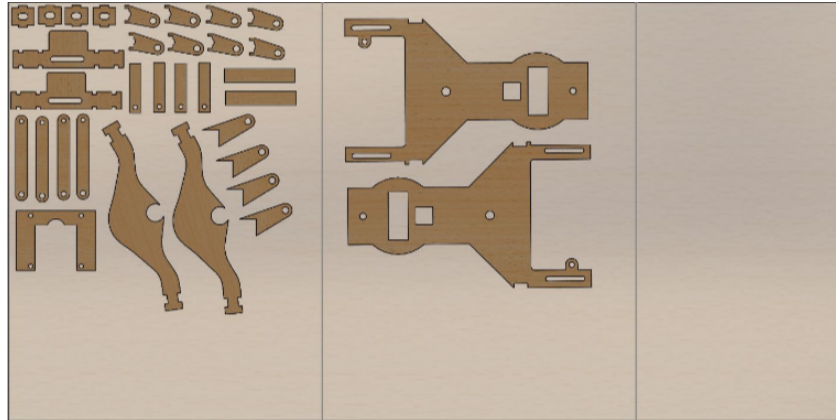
2-D template used for the laser cutter to cut out wooden pieces
